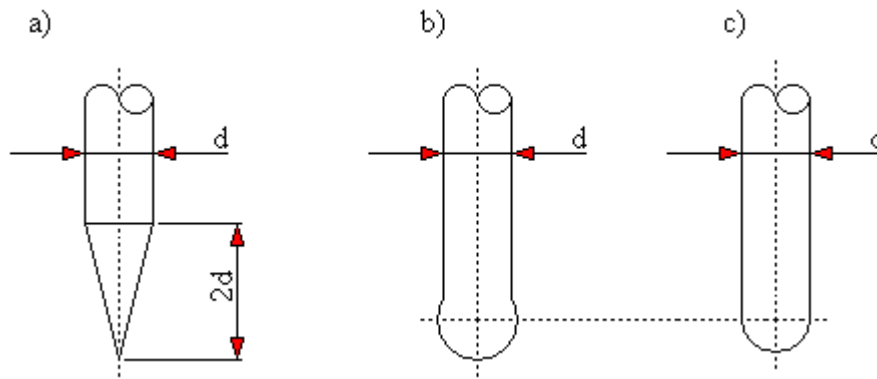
Examples of electrode terminal shapes for TIG welding [1]
